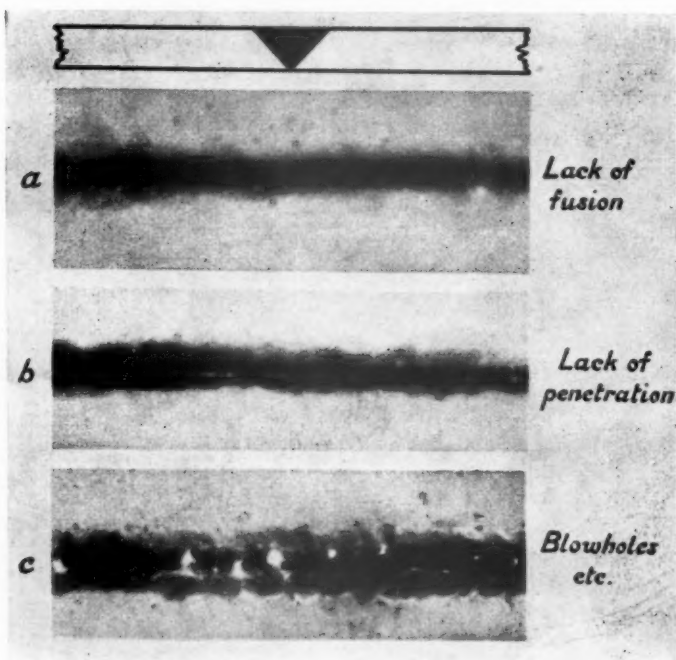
Radiographs of common defects in V-welds.
